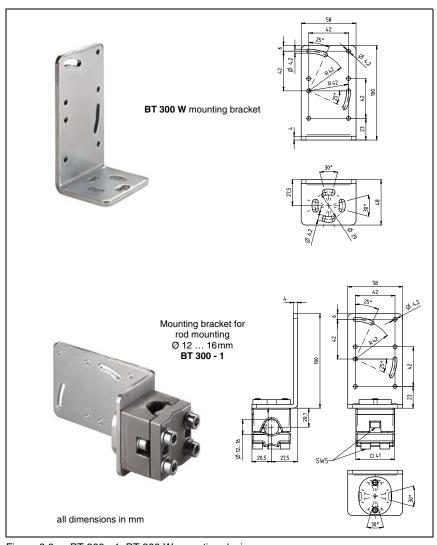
BT 300 - 1, BT 300 W mounting devices
